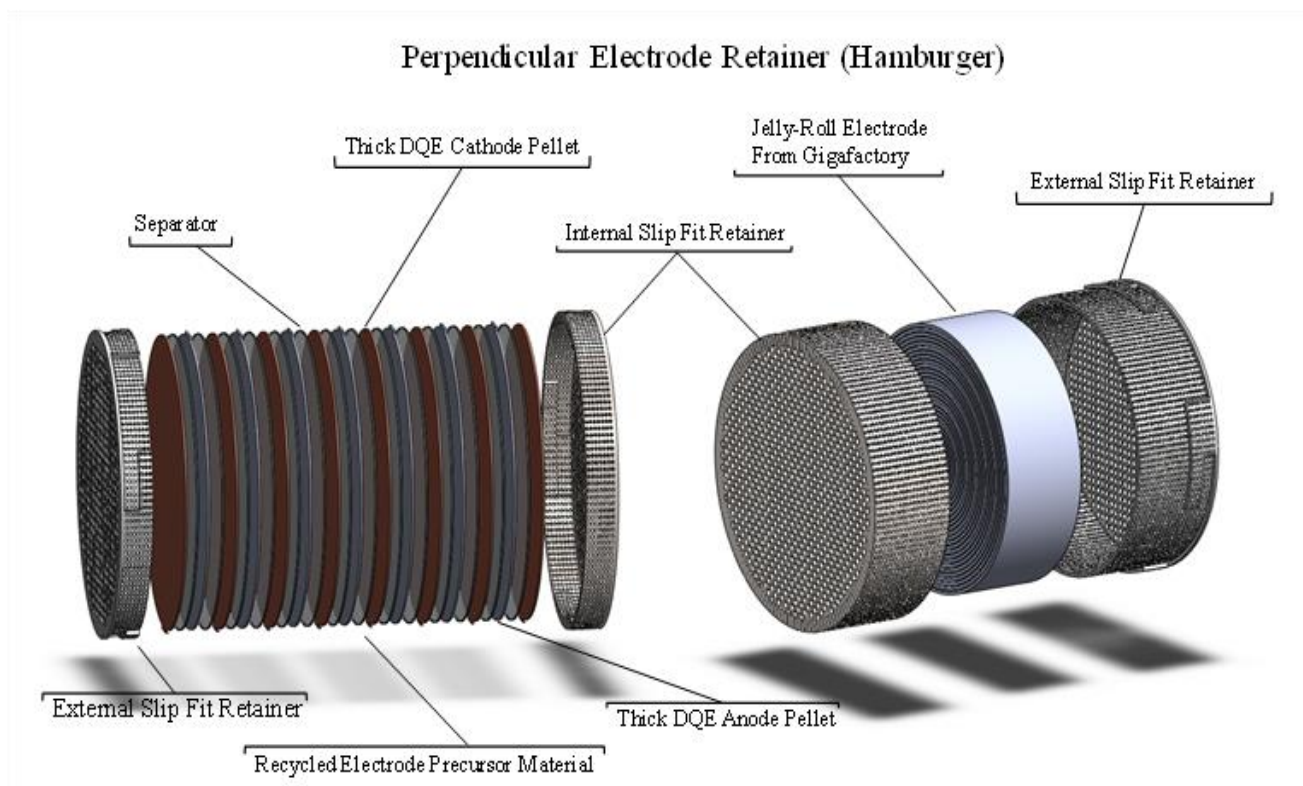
A few manifestations of our retainer mechanism for modular electrode assembly, where retainers containing electrode stacks can then be connected in series/parallel as desired. On the left, free standing, large format, pellet electrodes are stacked along with current
